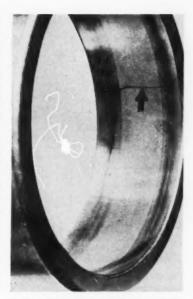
FATIGUE CRACK from faulty contact between ring and housing.
